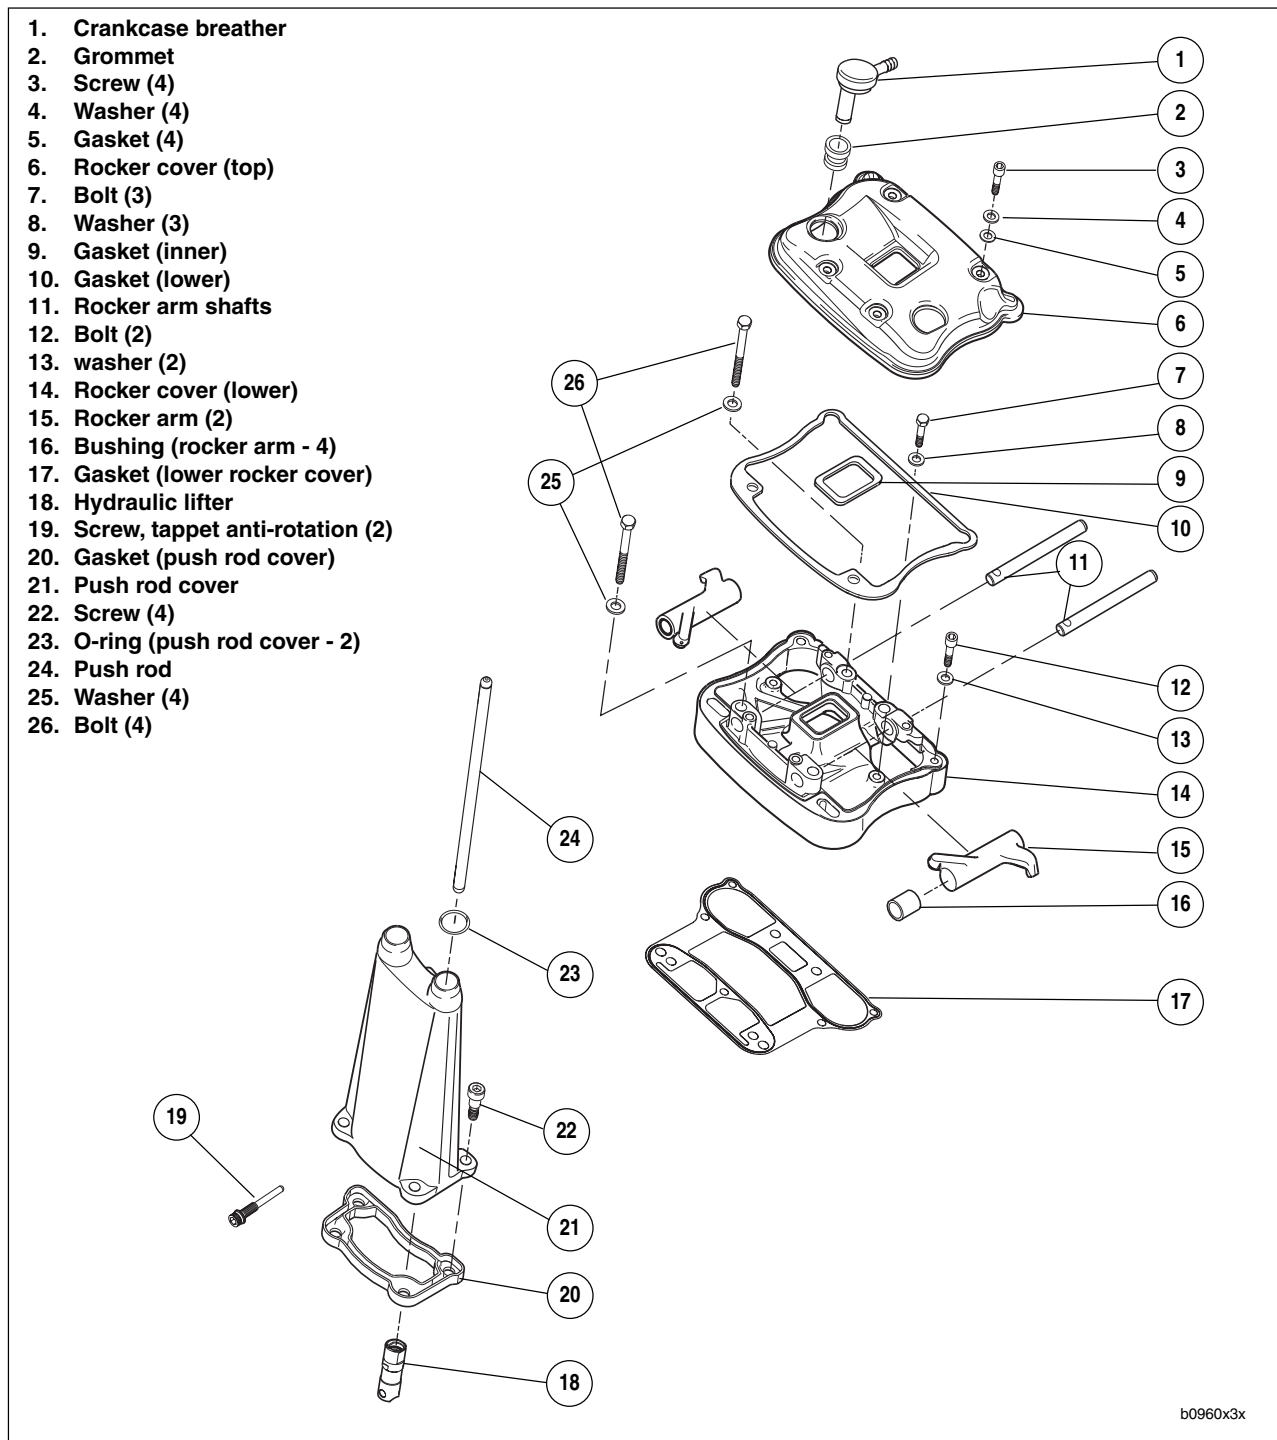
Rocker Arm and Push Rod Cover Assemblies
